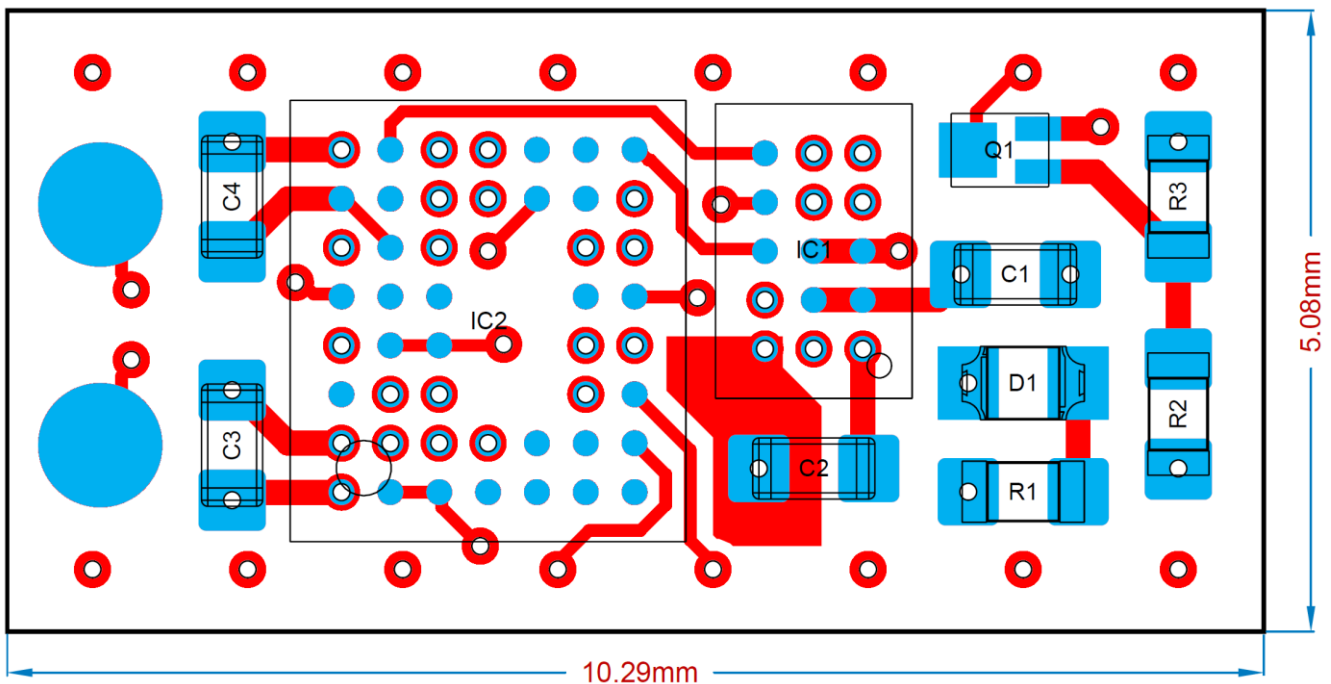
Reference Design 2: Mini Module - Assembly View TOP
